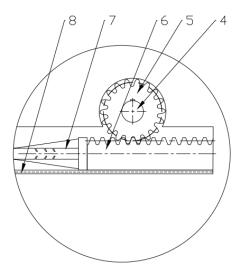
Schematic diagram of biopsy function module. 4 - Drive motor shaft, 5 - Drive gear, 6 - Rack module, 7 -Biopsy module, 8 - Slot.
